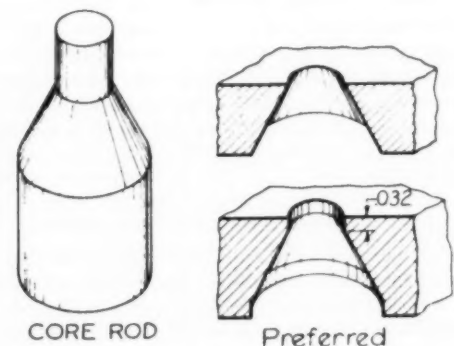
TAPER DESIGN TO PREVENT CORE-ROD DAMAGE
